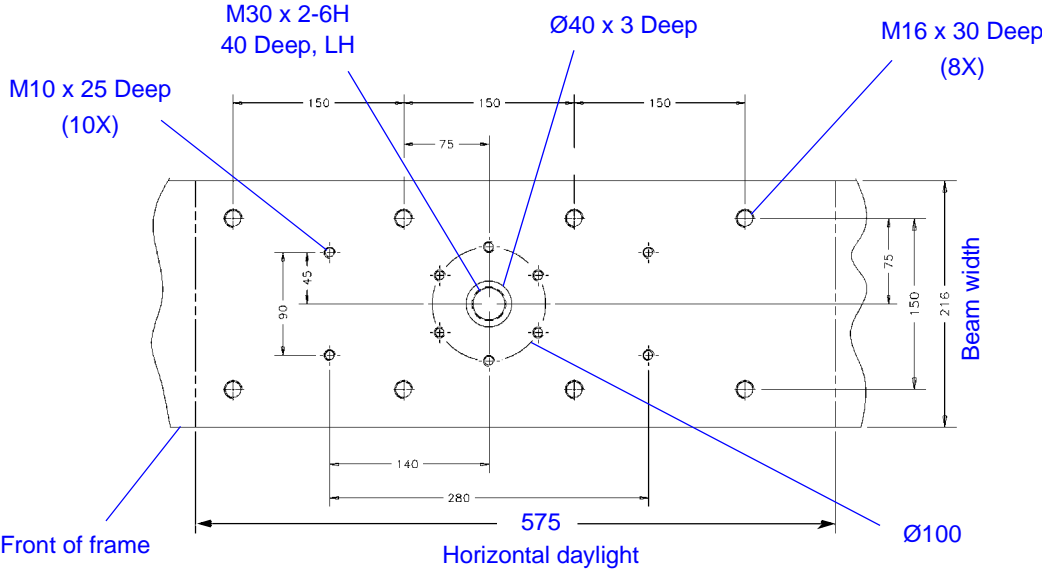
Series 5581 and 5582 Standard Configuration - Base Beam Mounting Dimensions
